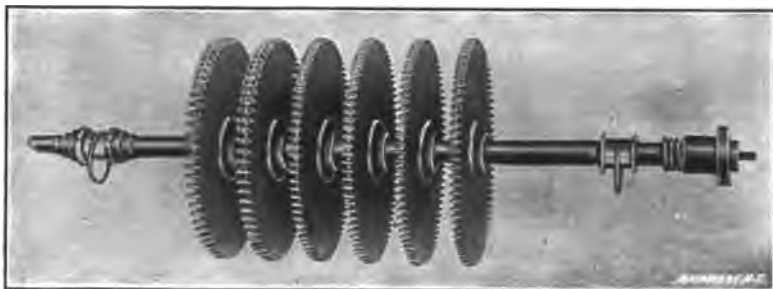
Shaft of the Kerr Turbine, with Six Disks
